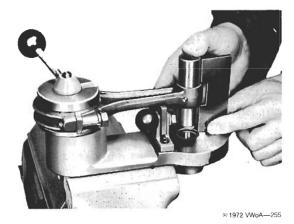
Mandrel turned so that machined face is at a right angle to connecting rod centerline.
